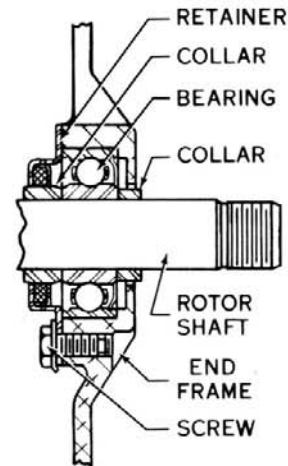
Drive end bearing assembly, early production (15-SI/116).
